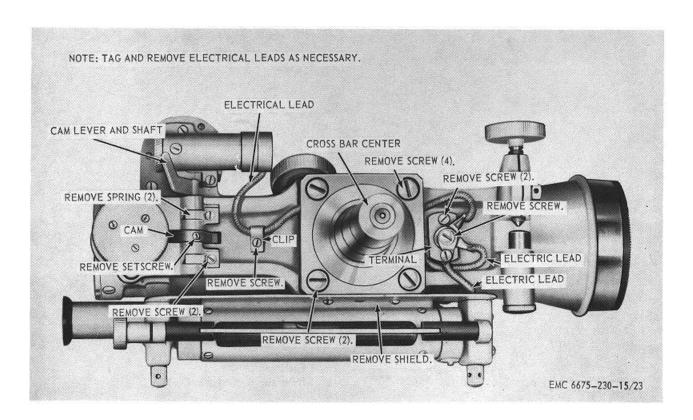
Crossbar, crossbar center, and lifting cam, removal and installation.
